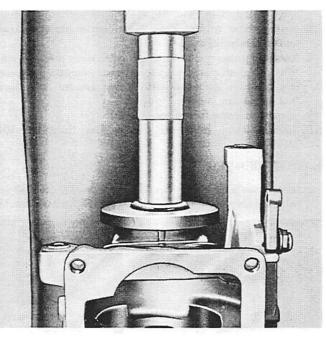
Placing Upper Oil Seal in Crankcase (Not on Mark 25-20H Models)
